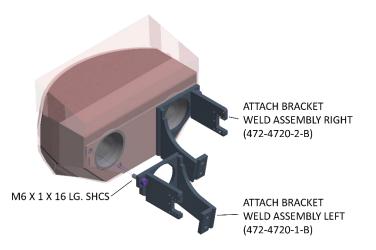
Left Attachment Bracket Assembled to Internal Plate
